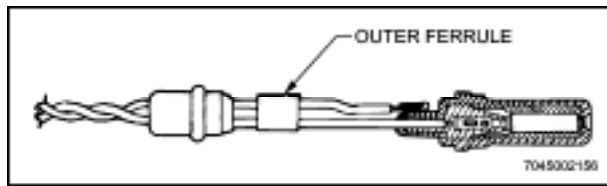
Final Assembly and Outer Ferrule Before Crimping the Outer Ferrule
